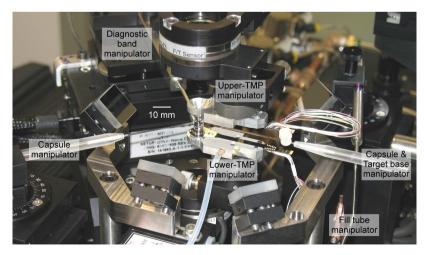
Close-up view of the manipulator system, with a target being assembled.
